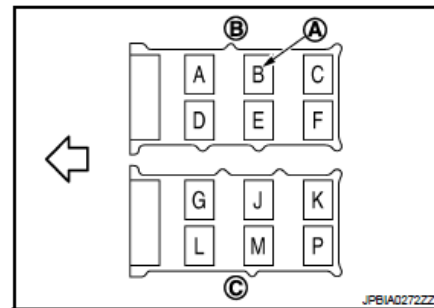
Identifying Camshaft Brackets Stamp Marks
